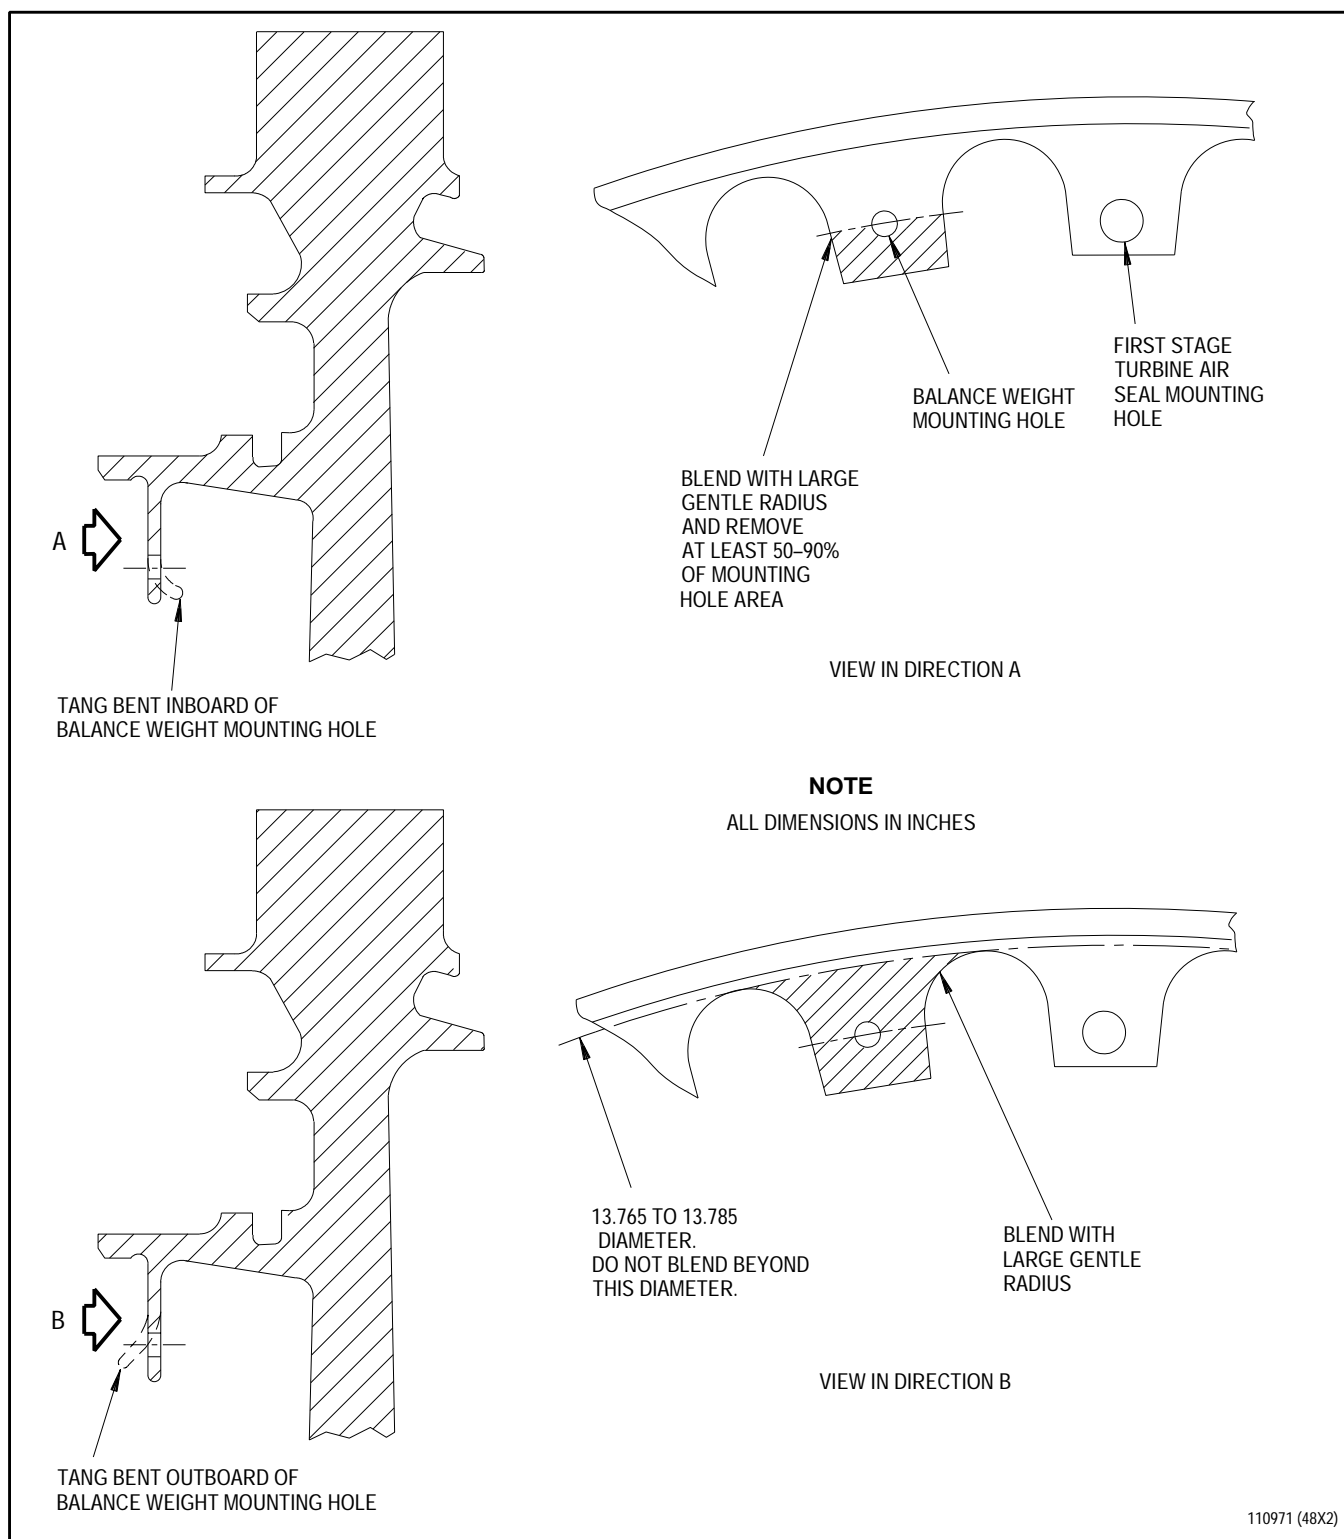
First Stage Turbine Disk Balance Weight Flange Tang - Removal
